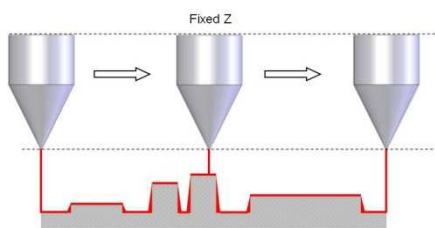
Schematic view of large off-deck printing for 3D conformal coating with fixed Z
